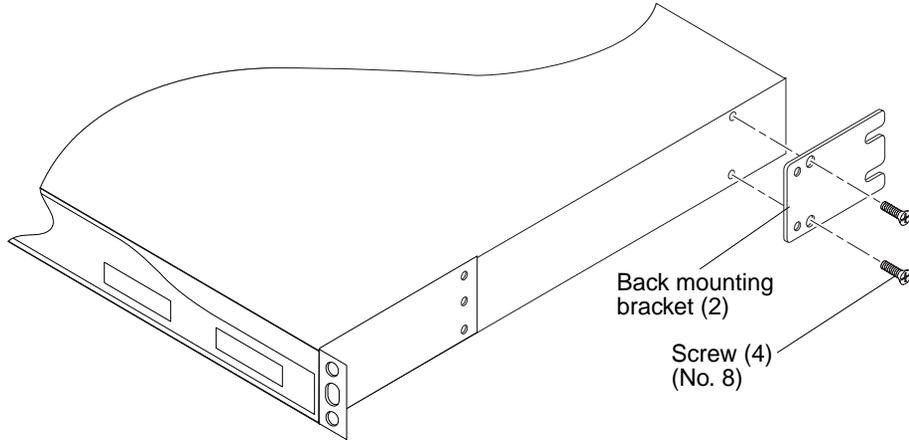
Removing and Replacing the C3524 Ethernet Rear Bracket
